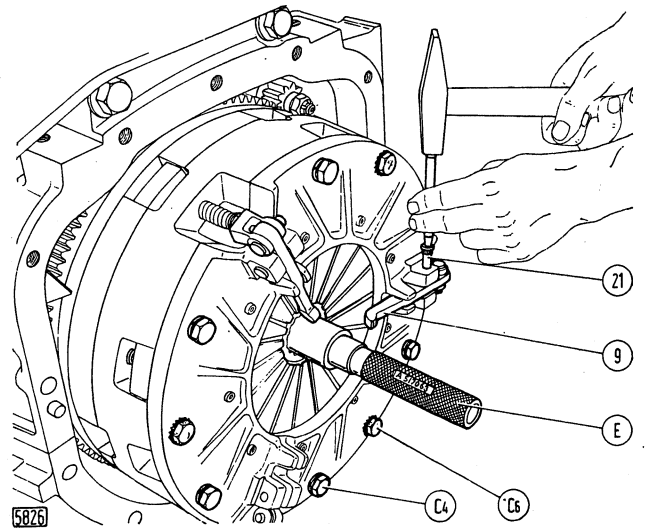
Fitting the release levers (9) pivot pins (21) to the clutch installed on the engine.
